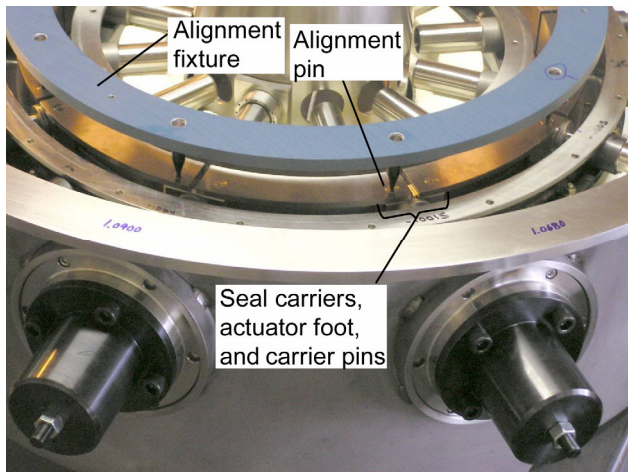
ACC test rig with carrier alignment fixture installed. Note gage pins insert into precision centering holes in carrier pins. Alignment fixture used to set nominal or “home” position for all carrier segments.
